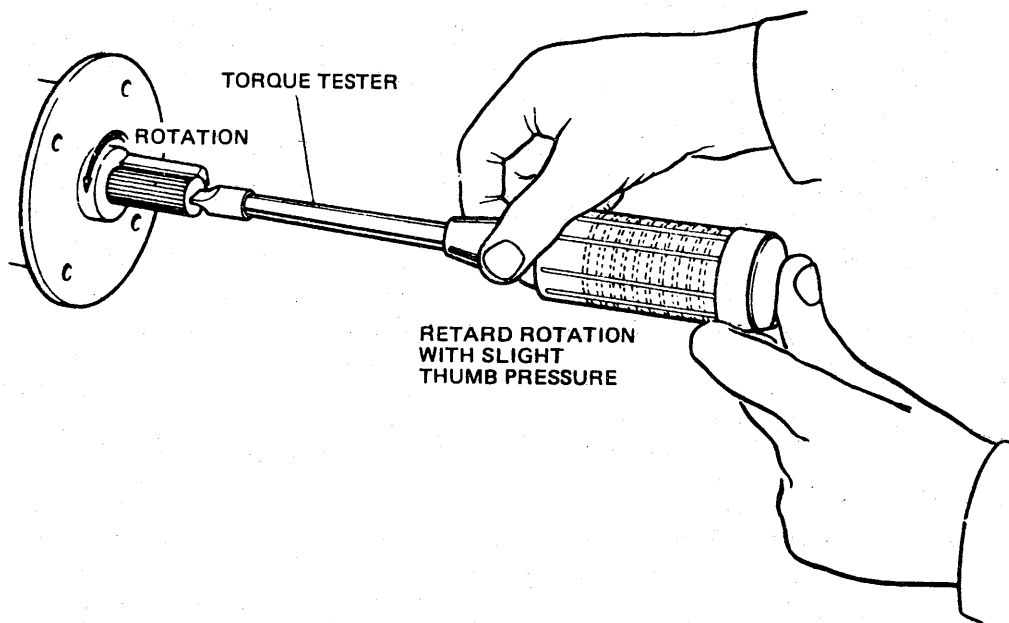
TORQUE TESTING OF SERRATED ROTOR ICE DETECTOR HEAD
